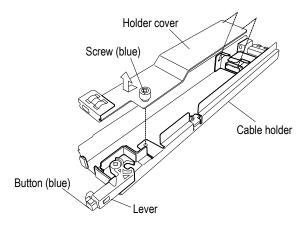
Attaching/Removing the Cable Holder and the Holder Cover
